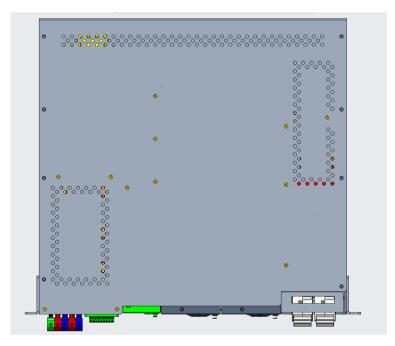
Top View Rack Mount: Solar Add-On Shelf with 19-inch Mounting Brackets with 5-inch Recess
